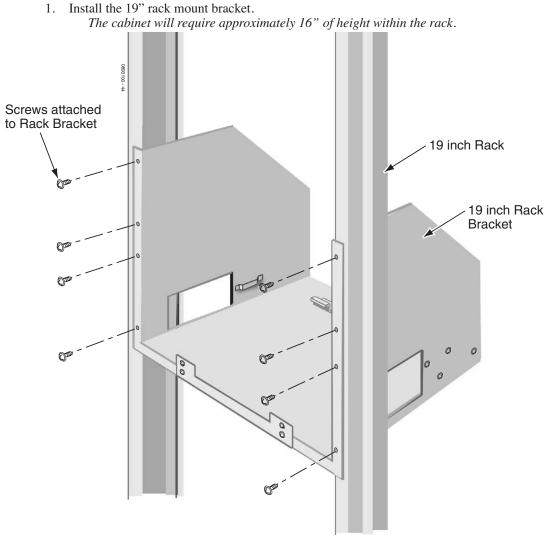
INSTALLING THE MOUNTING BRACKET ON THE RACK
